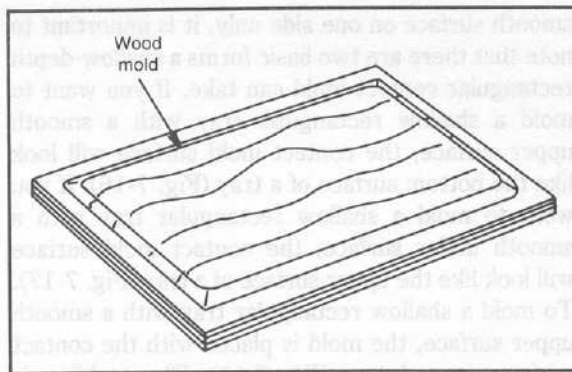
Wood mold for laminating tray shape with smooth concave side.
